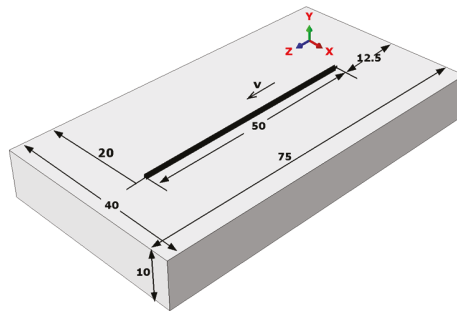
Schematic of the autogenous laser weld test showing the overall dimensions, the direction of the welding speed, and the x, y, and z directions. Units in mm.
